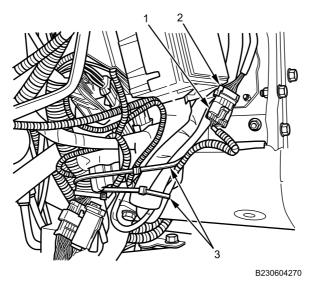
PDC Harness Cable Lock Straps and Wiper Motor Harness.
